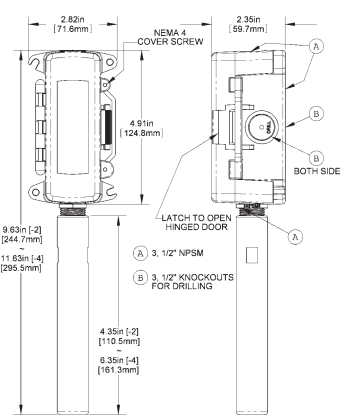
BB2, 2" & 4" Buffer w/Plastic Threaded Fitting
